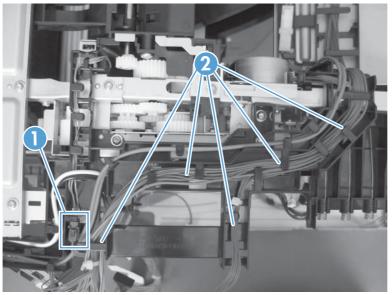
Remove the fuser drive assembly (1 of 6)
